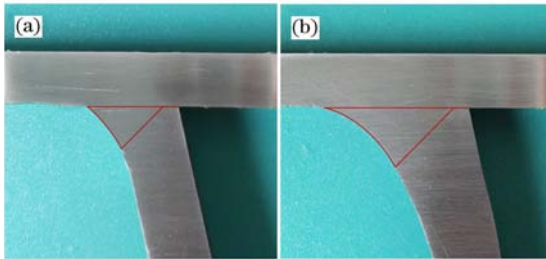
Welding area of TUR (a) and LTUR (b).
